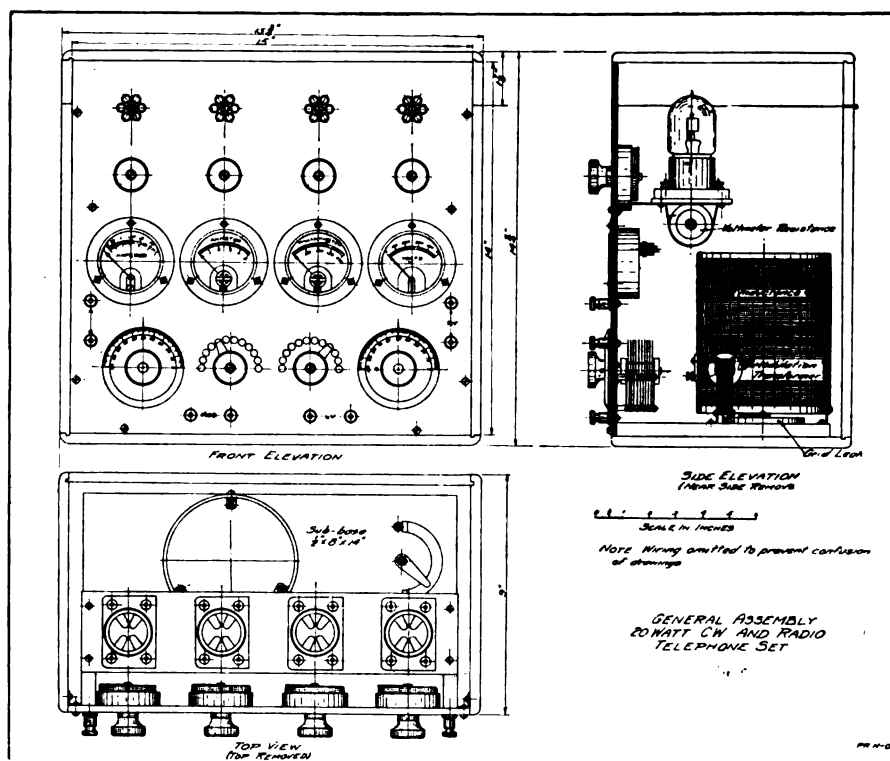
is a rear view of the panel removed from the cabinet. The builder should note especially the rigid type of bus wiring used, all connections being as straight and direct as possible. Fig. 2 is a general assembly drawing which will help to make clear certain points which cannot be readily seen from the photographs.
